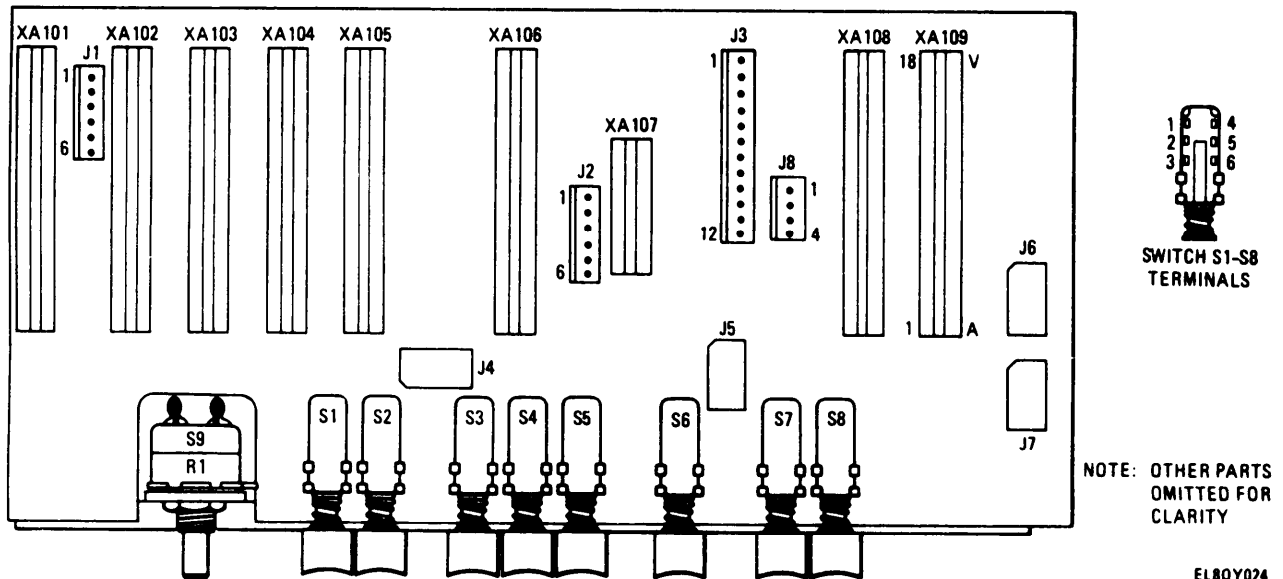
Counter Interconnect A100, Connector and Switch Locations
